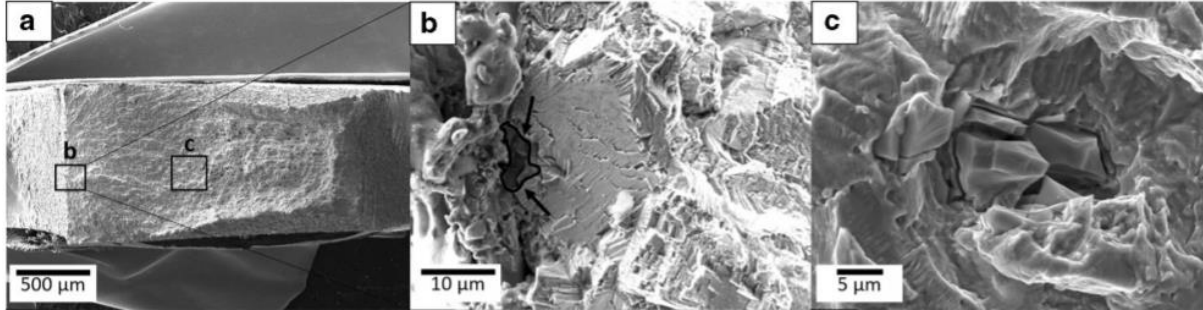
HCF fracture surface of a wrought bar IN625 specimen hot rolled extruded and annealed at different magnifications studied using SEM fractography [51].
